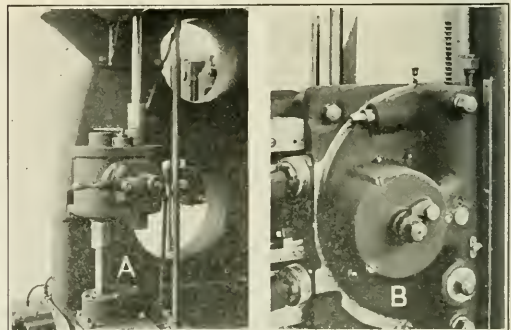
Rail Elevating Device and Spring Counterweight for Ram
